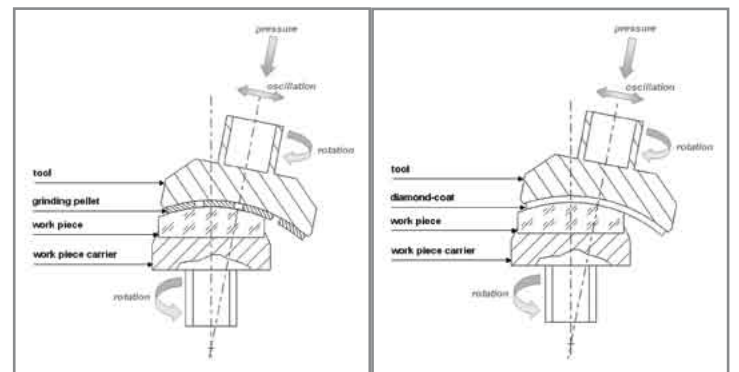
Scheme of the precision grinding process using pellet-covered (left) and diamond-studded moulding tools (right).
